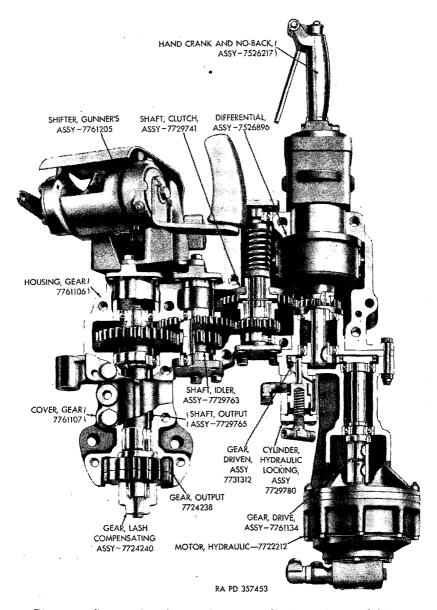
Cross-section of traversing gear mechanism and manual drive.
